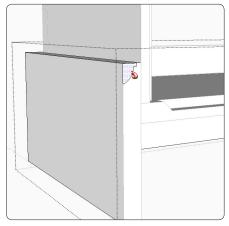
Draw the molding shape, then use the Follow Me Tool to create the shape on all three sides of the base.
